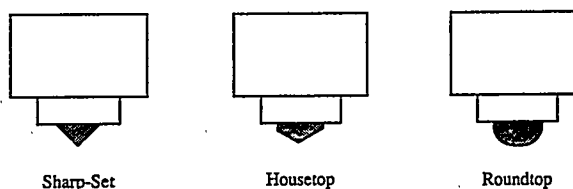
Profiles of TSP cutters used in single-cutter wear tests. (TSP disk cutter not shown.)
